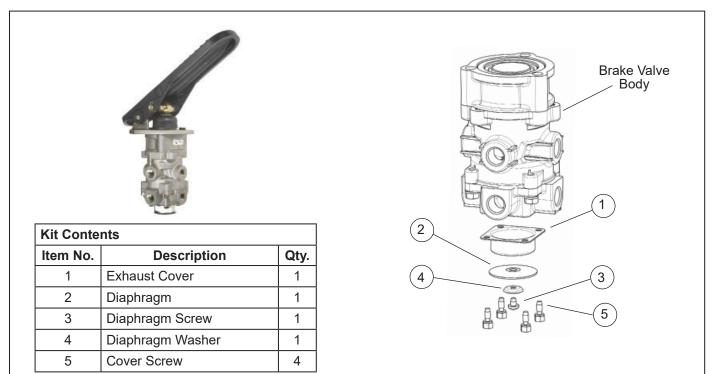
Bendix[®] E-10[™] Brake Valve Exhaust Cover Kit
